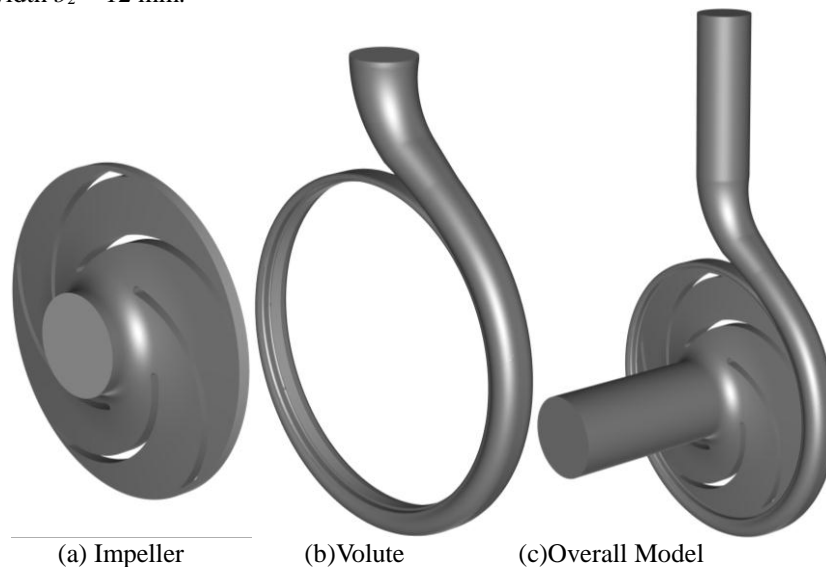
Three-Dimensional Model of Centrifugal Pump (a) Impeller (b) Volute (c) Overall Model
